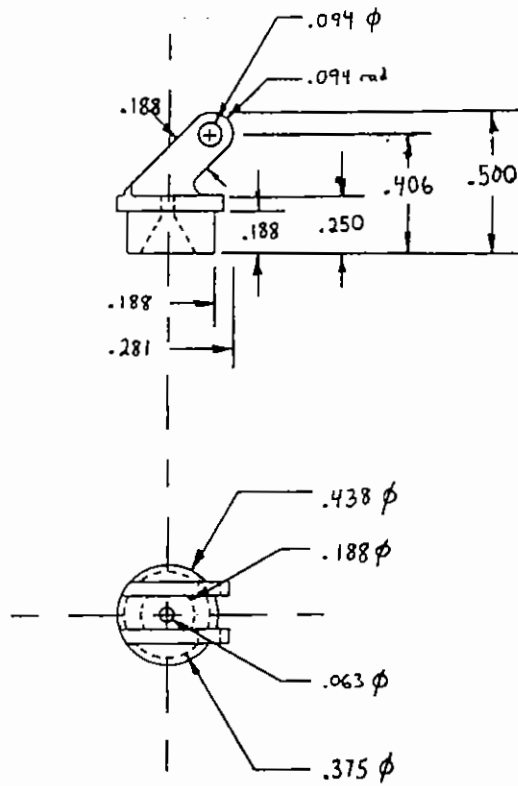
Upper Faceplate of the Actuator Package Gearbox
